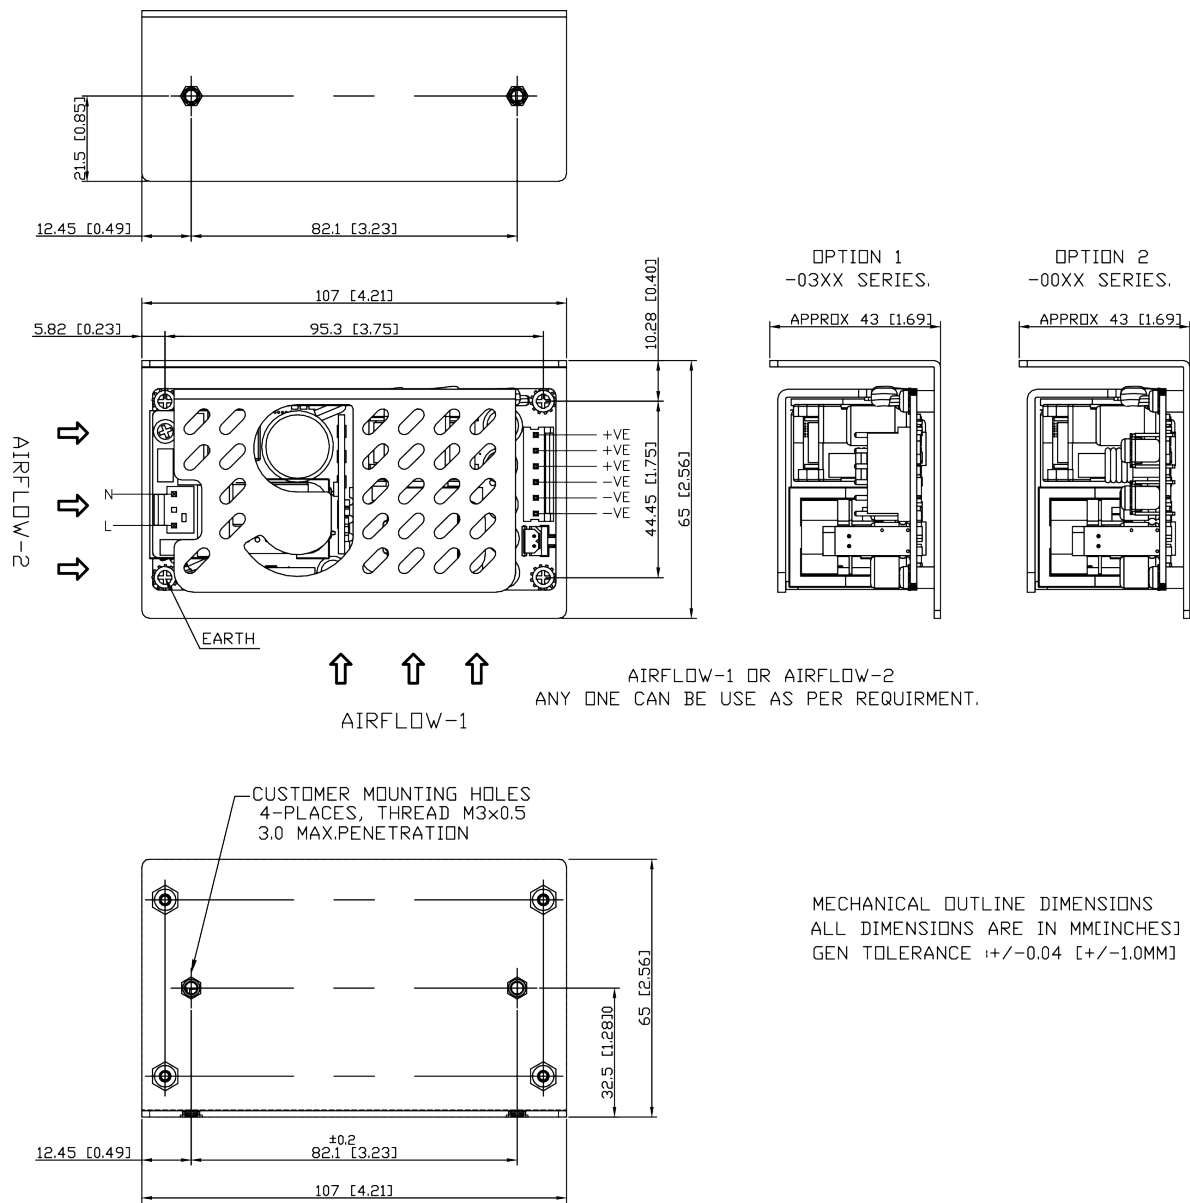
Mechanical Drawing – MEPG300-0XXX-L
